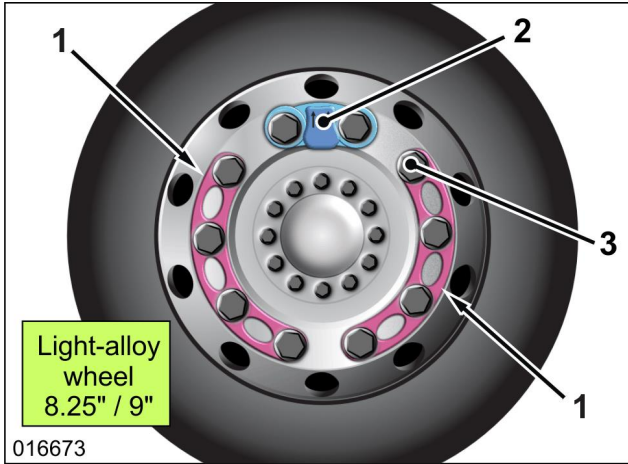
Installation of WEM on front axle wheels and single mounted trailing axle wheels (8.25" and 9")
